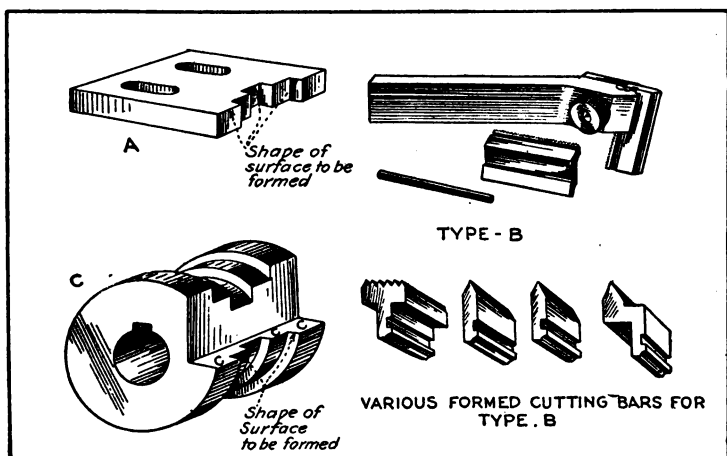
TYPES OF SINGLE-EDGED FORMING TOOLS
